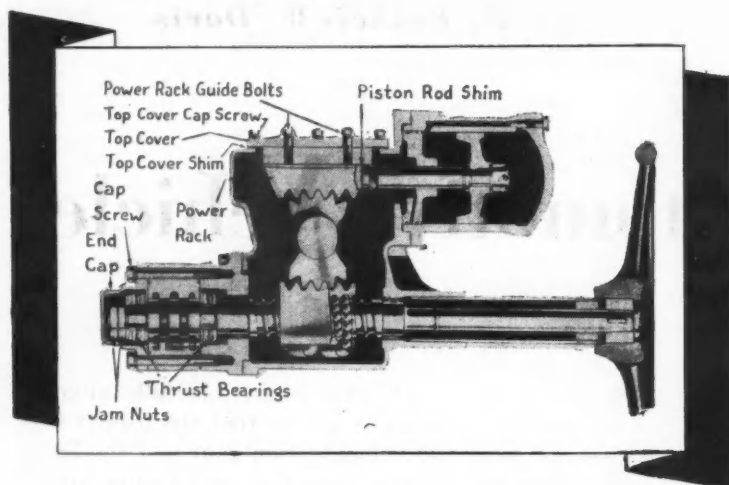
Saginaw-Bendix—integral hydraulic steering gear
